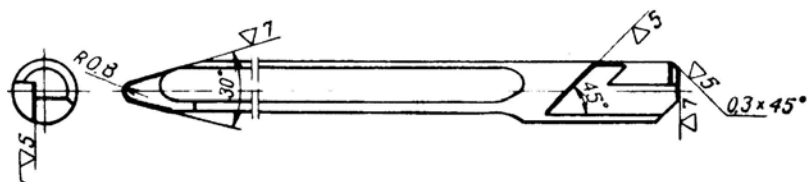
Repair drawing of 9-mm Makarov pistol drummer
